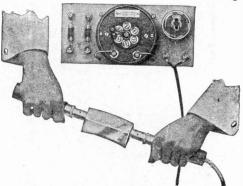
LEATHER WORKING TOOL AND SWITCHBOARD
